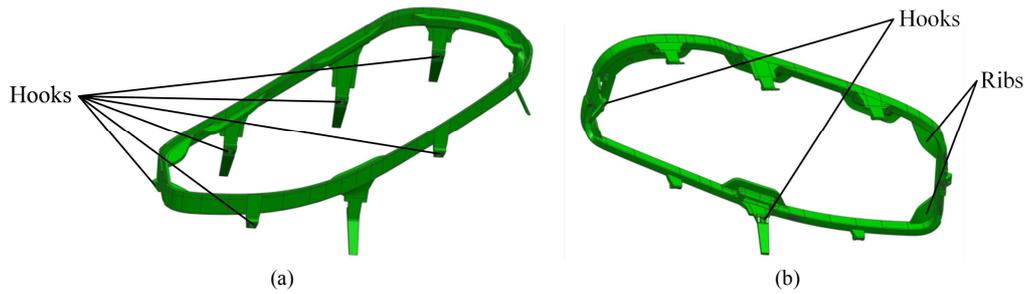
Automotive brake Plug-in 3D model (a) Front view (b) Side view.
